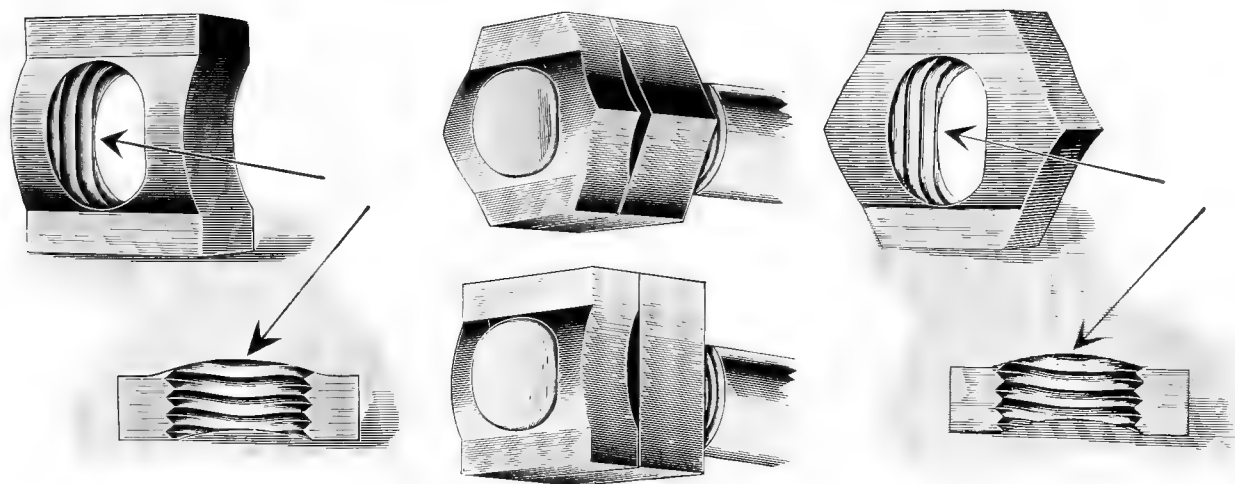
Square and Hexagon Grip Nuts, Showing Curve in Thread-Pitch Exaggerated to Show Locking Method. Grip Nut Company.
